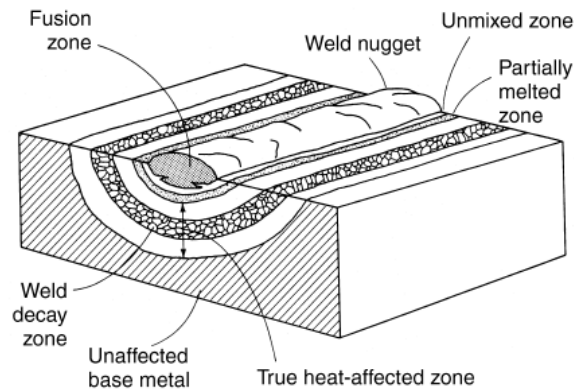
Intergranular corrosion (weld decay) of stainless steel weldments (ASM International, 2006).
